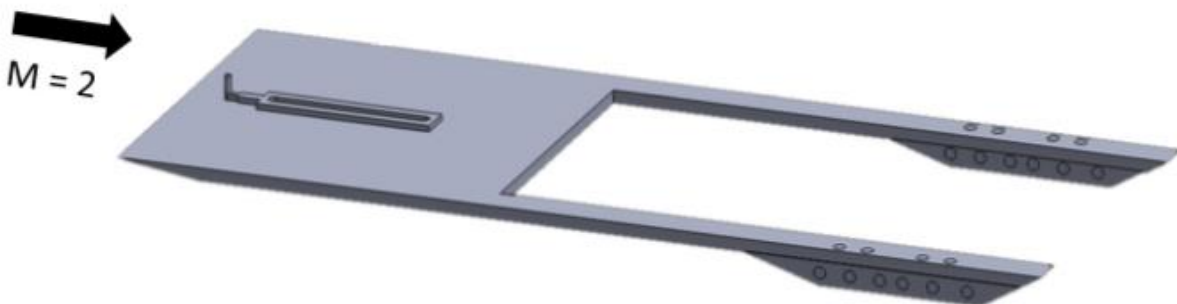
CAD representation of the flat plate and cylinder geometry (From Ref. [18]).
